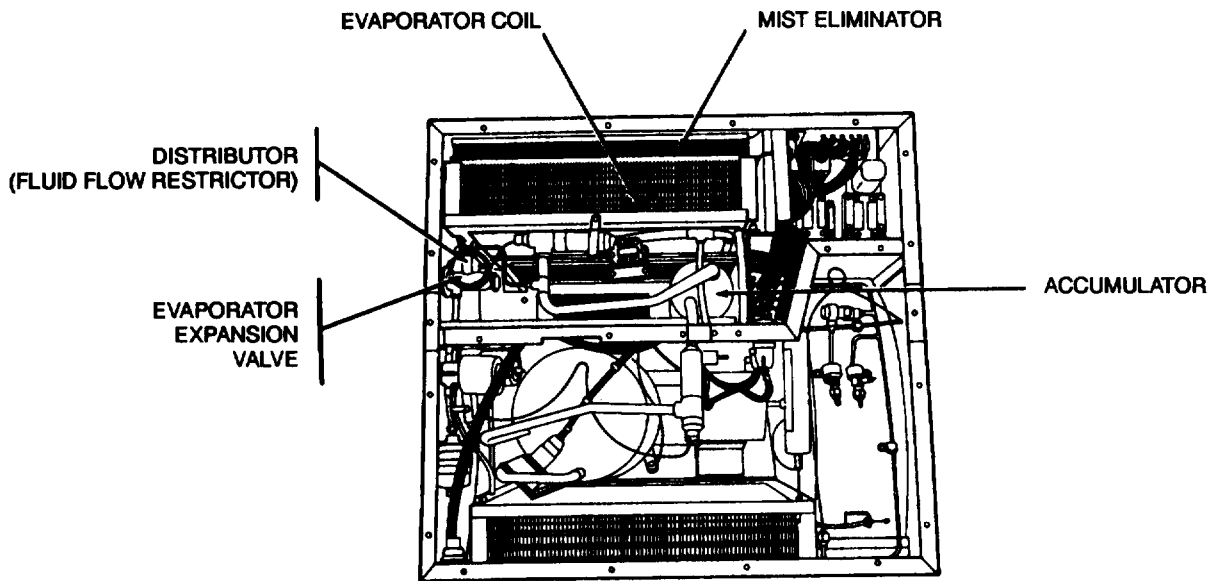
Air Conditioner, Evaporator Section (Sheet 1 of 2)
